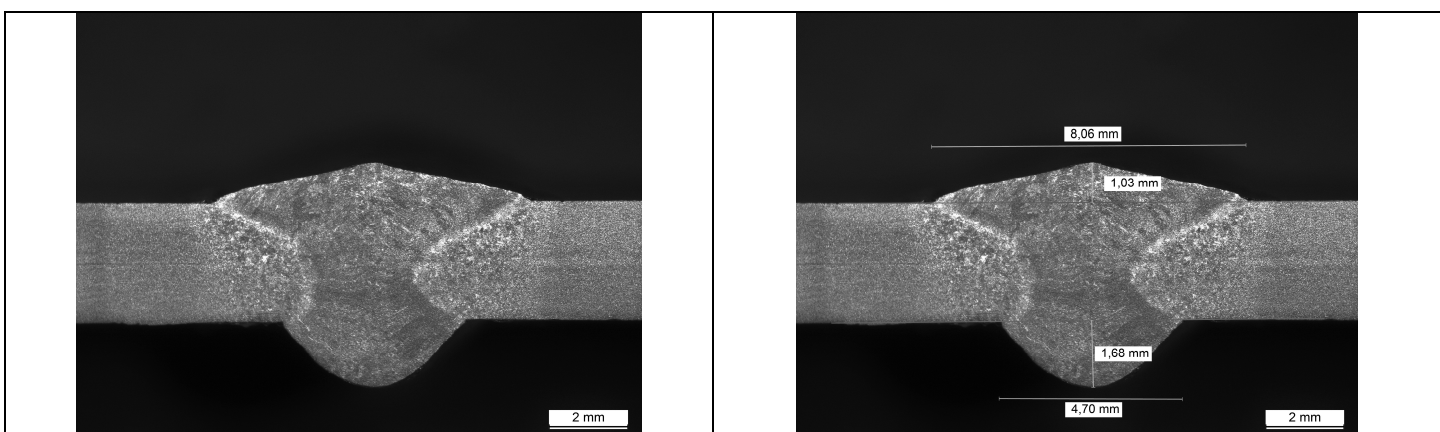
Macrographic examination of the 3mm butt weld sample
